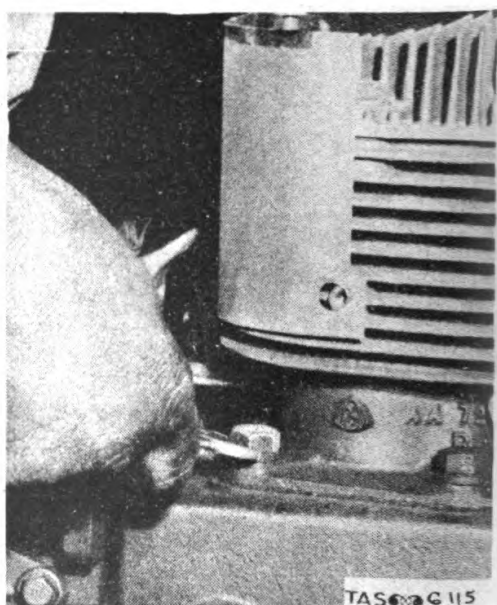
Removing Four Cylinder Base Cap Screws and Removing Cylinder from Engine.
